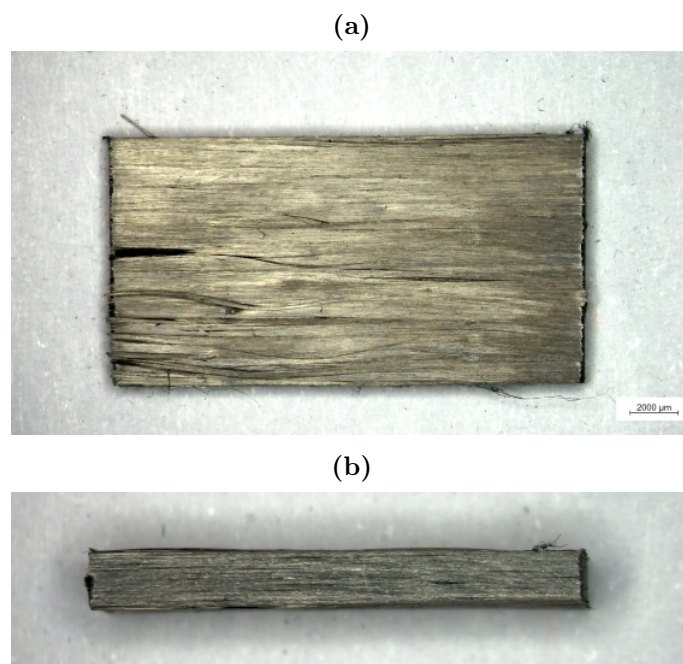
Image of the (4.28a) bottom side and (4.28b) side view of a wlu-UD-ep2_FP specimen after testing, showing shear failure.
